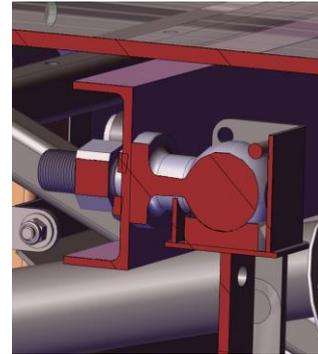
Cross Section Showing Pinned Ball and Socket Mount
